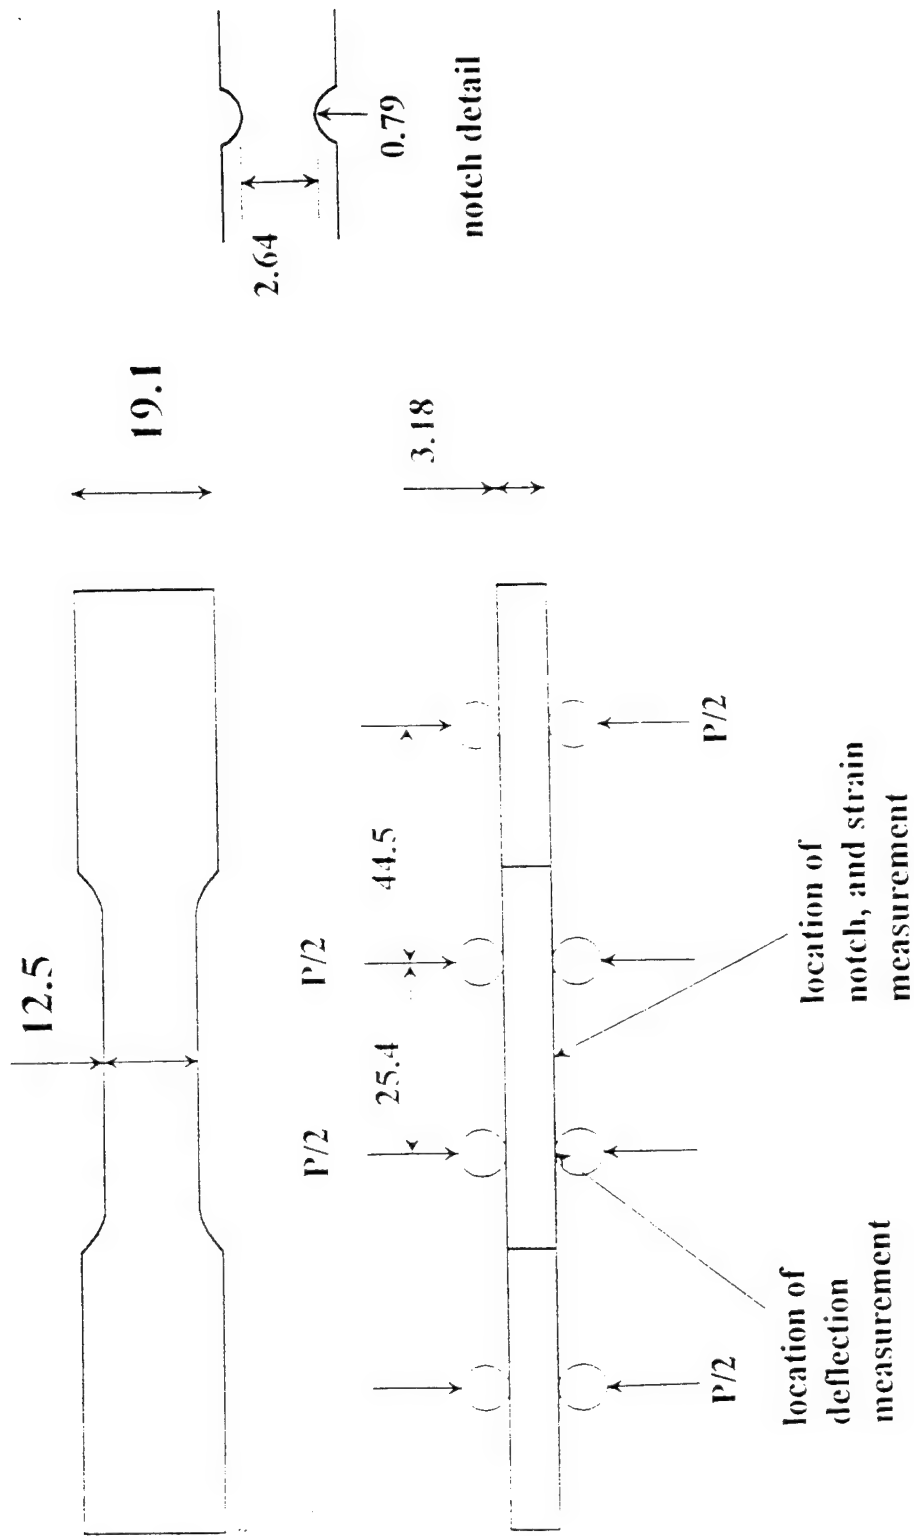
Schematic of test fixture and specimen geometry, all dimensions in millimeters.
